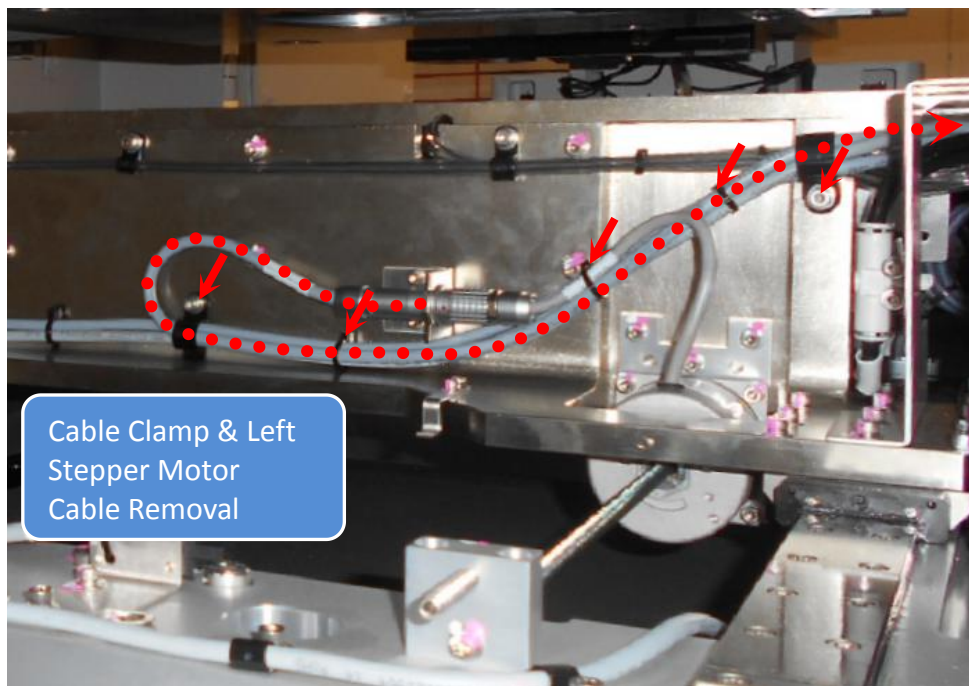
Cable Clamp & Left Stepper Motor Cable Removal
